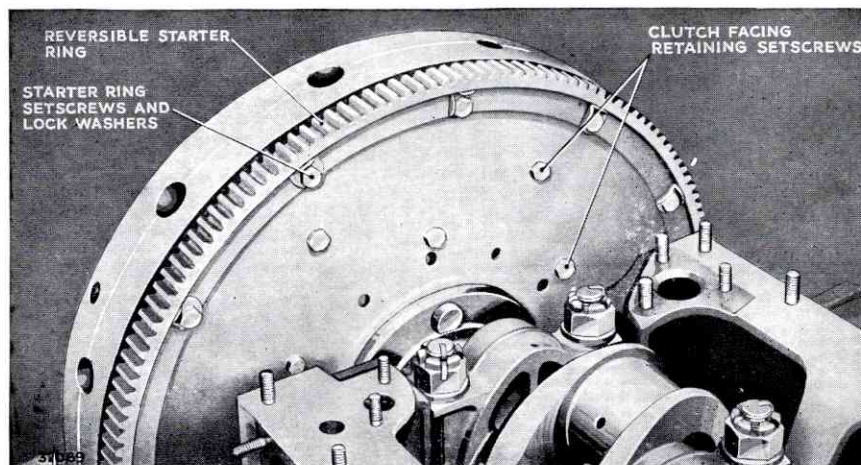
REAR VIEW OF FLYWHEEL AND STARTER RING
